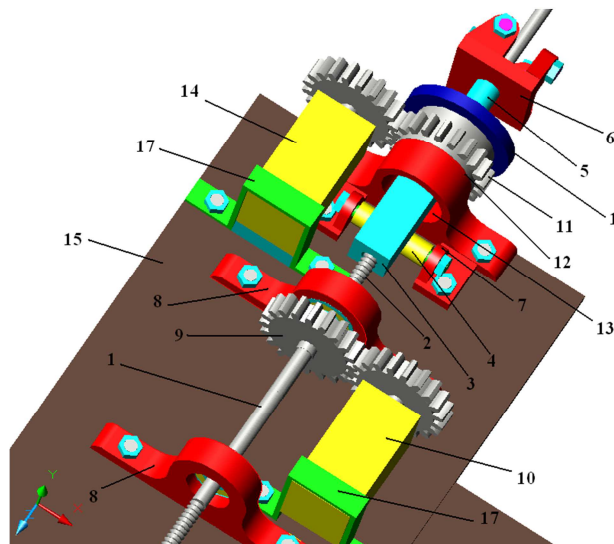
Isometric view of Complete arrangement of Mechanism for Slider Link
